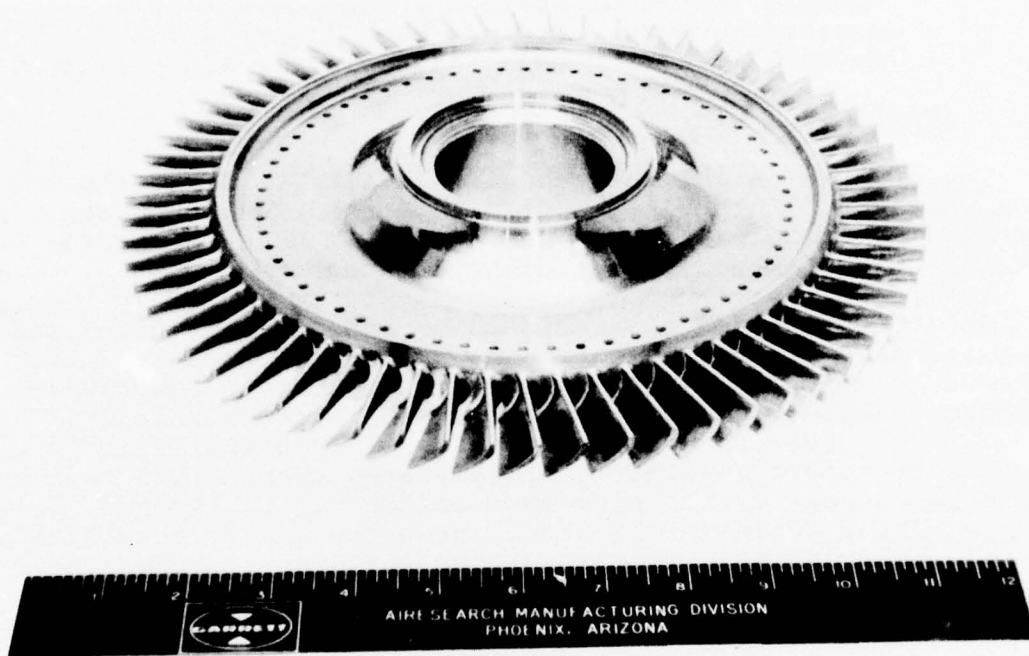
Fully-Machined Laminated Axial Turbine Wheel.
